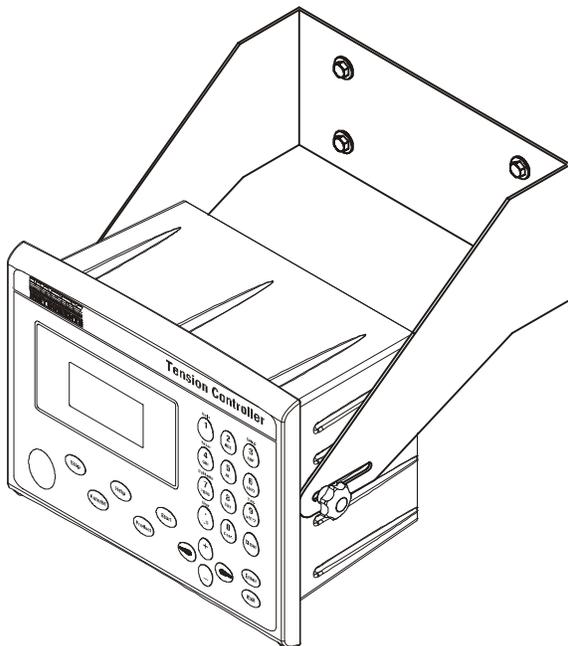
TENSION CONTROLLER INSTALLED IN A SWIVEL/WALL MOUNT
